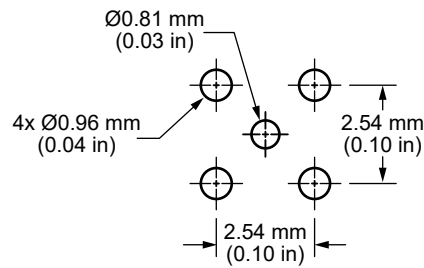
Recommended PCB Dimensions for the CONSMP001-1
